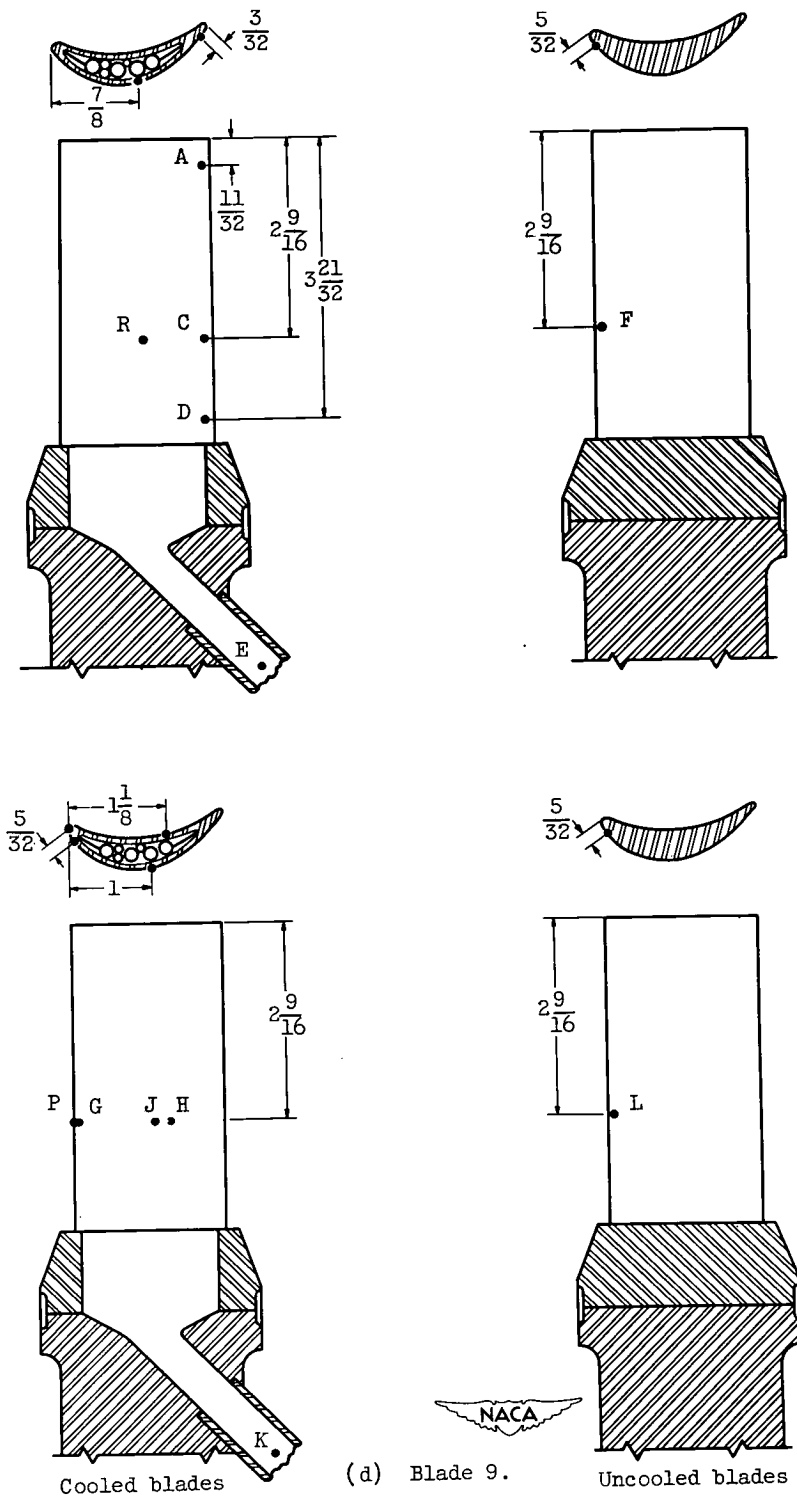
Concluded. Schematic diagram of thermocouple locations on cooled and uncooled blades investigated. Dimensions in inches.
